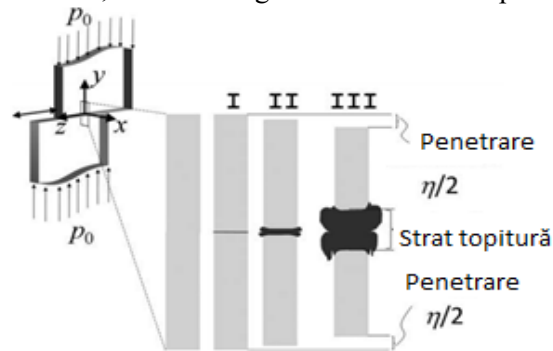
The evolution of the macroscopic appearance that occurs in the area of the weld seam during vibration welding. The scheme shows the cross-section of the weld area in plane $x - y$ with the vibration carried out in the direction z , [2].
